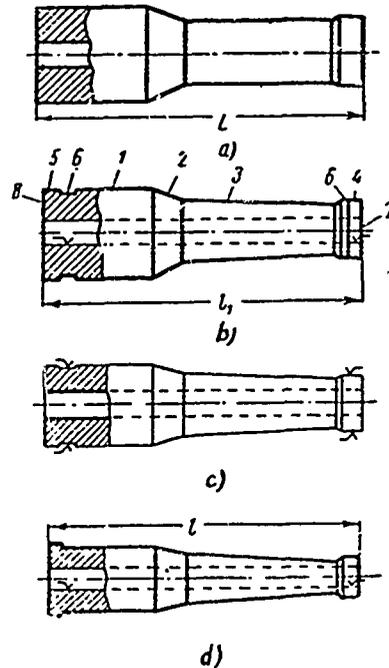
Schematic of machining treatment of the exterior and interior surfaces of a tube
